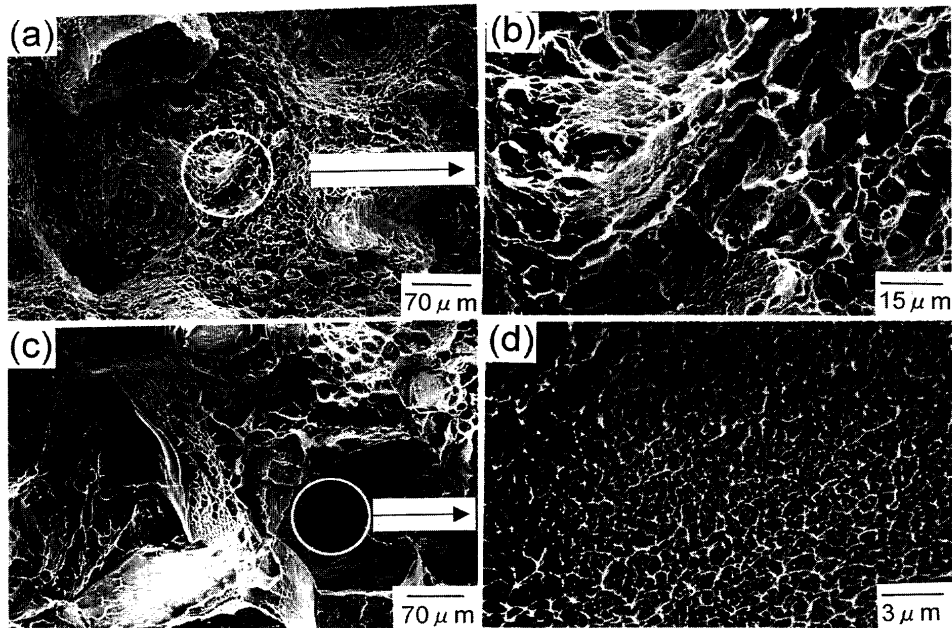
Fracture surfaces of tensile specimens.
